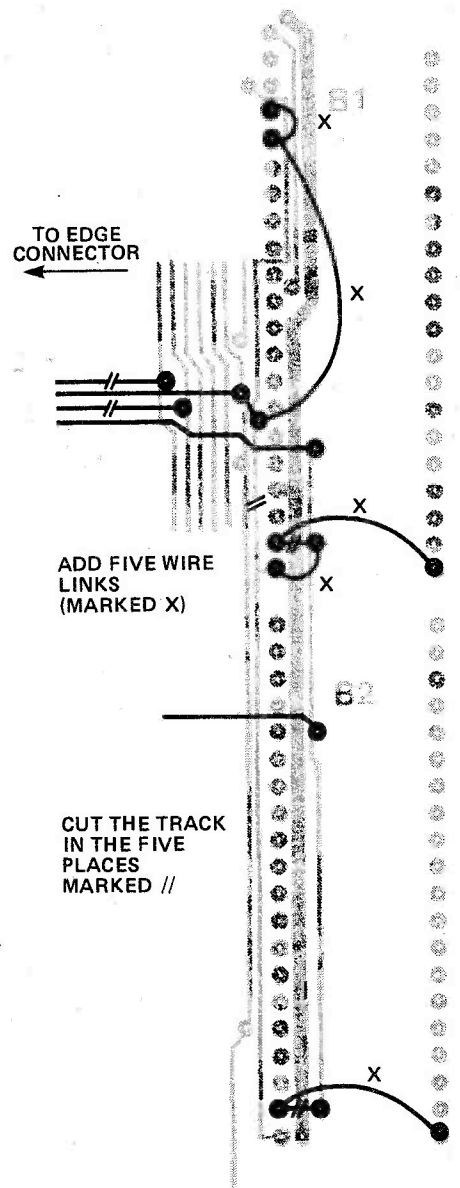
PCB modification to enable 6821s to be used in place of 6522s.
